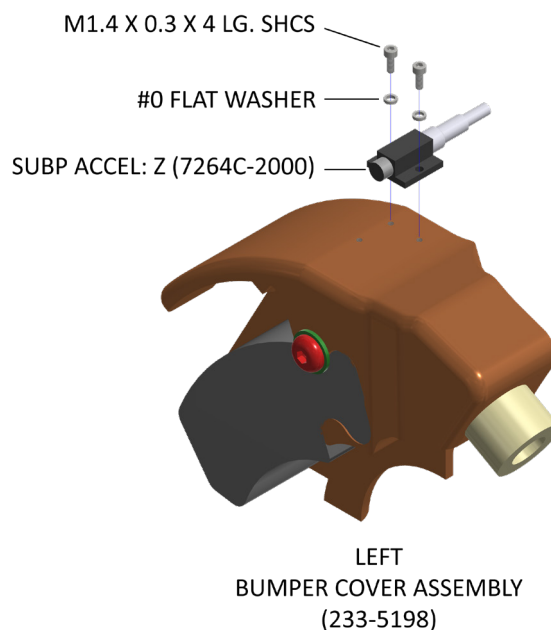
Attach an Accel to the Left Bumper Cover Assembly
